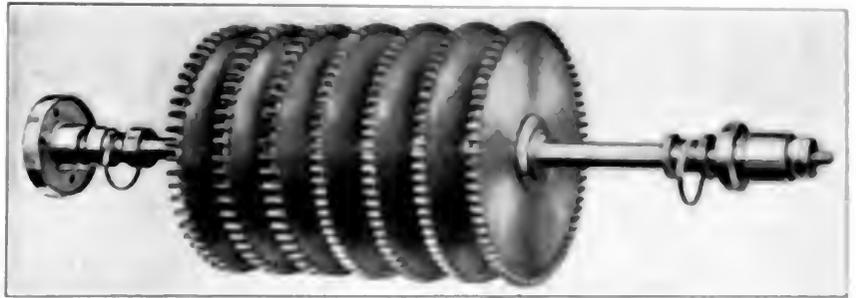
OUTLET ROTATING PART OF 18 INCH TURBINE WITH OTHER PARTS
